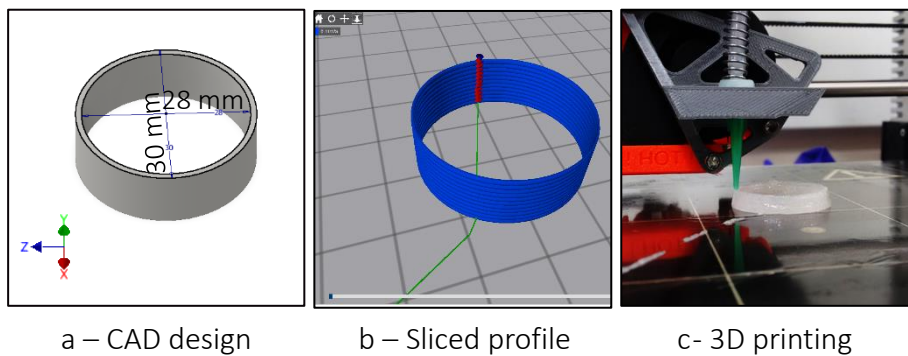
3D printing of a cylinder (dimensions in mm) using paste extruder. (a) CAD design with dimensions. (b) Sliced layer by layer profile of the cylinder. (c) 3D printing of the cylinder using Composite+Clay+CA formulation.
